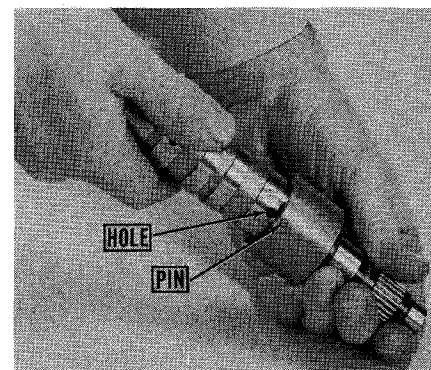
Pin in actuator sleeve must be engaged in hole in end of control valve spool before actuator assembly is installed. If spool cannot be pulled out of sleeve, pin is engaged.
